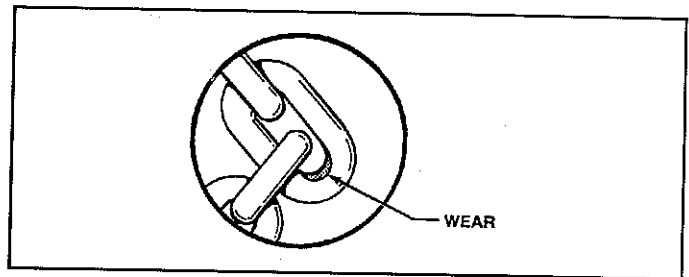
Check Chain Wear at Bearing Surfaces Between Links.
